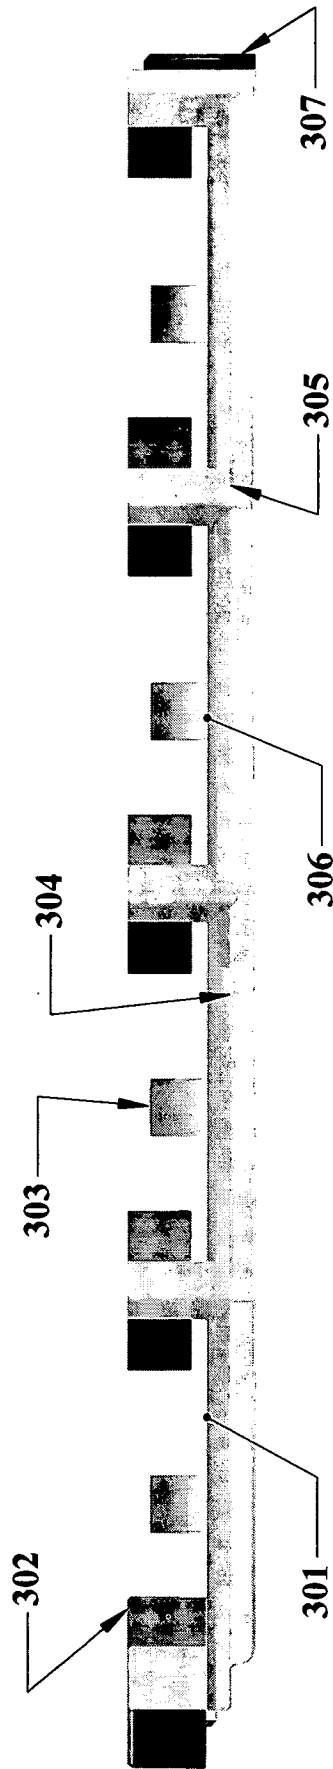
Perspective View of the Hard Drive Haven Faceplate
